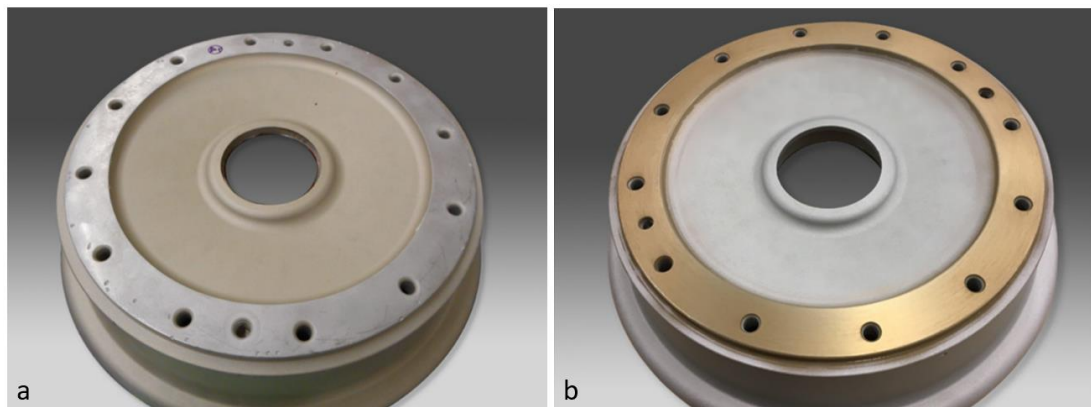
a) Corroded T-6 Aircraft Wheel b) After Cold Sprayed T-6 Aircraft Wheel [21].
